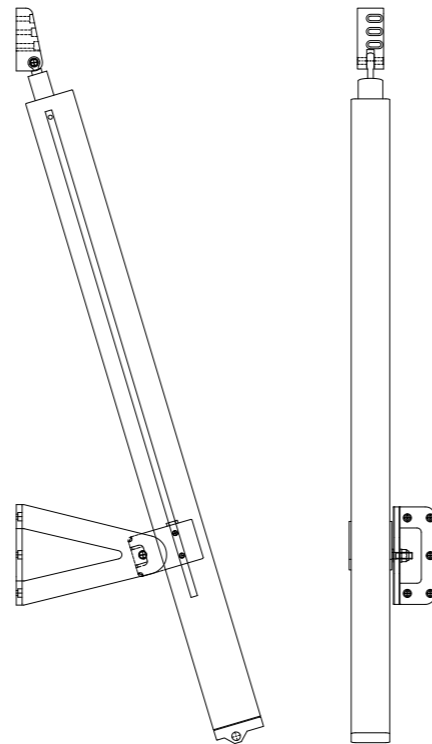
Type G spindle actuator with upper and lower console mounted with shifted pivot point
